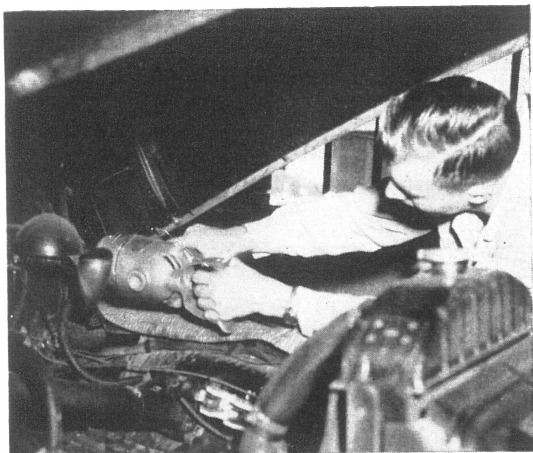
A hole is drilled through the fire-wall for the control cable (which now has been pulled up into the motor space)
